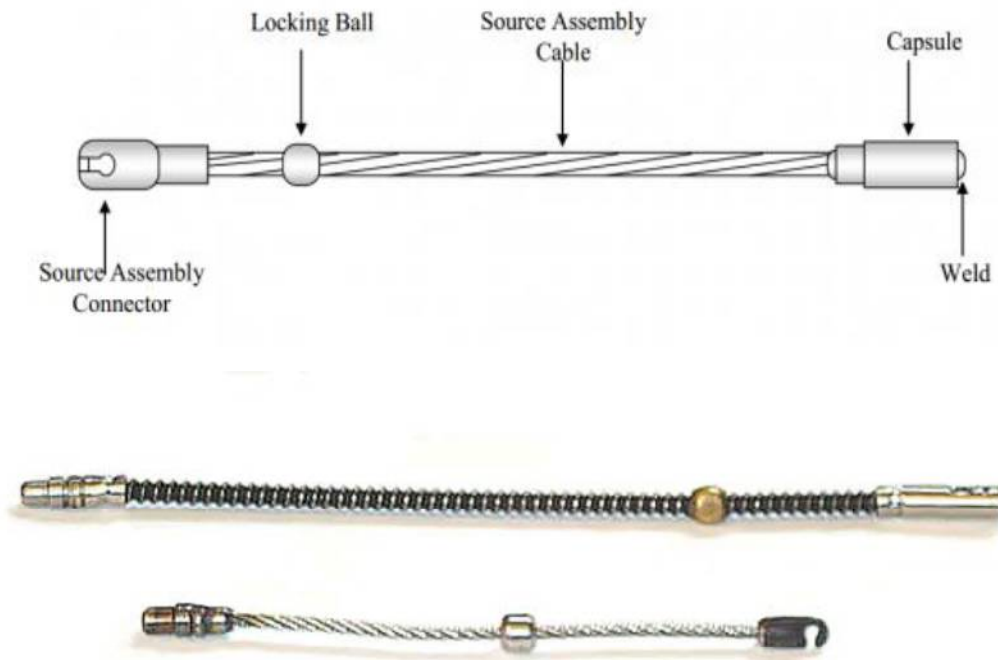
Drawing and picture of flexible source pigtail assembly
